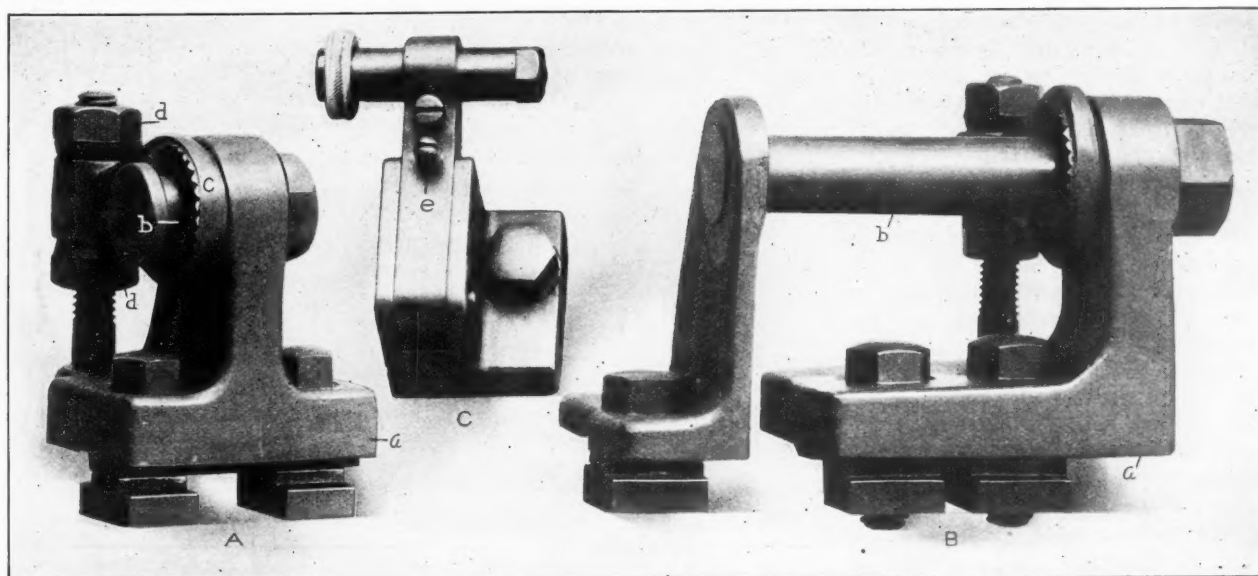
Tool-holders for carrying Circular Forming and Cutting-off Tools and a Cross-slide Knurling Tool-holder
